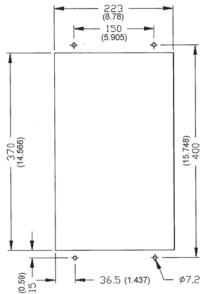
Cutout dimensions in air duct - Dimensiones mm (inch)
